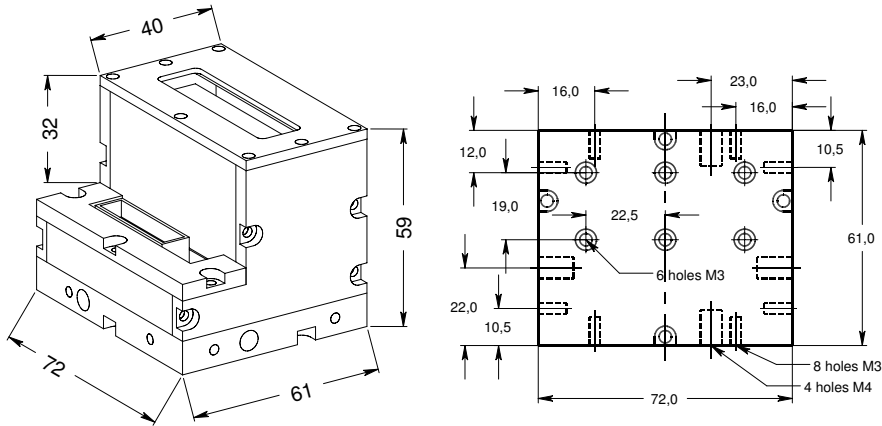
Technical drawing of the package and mounting holes of the 30mm 37-channel PDM
